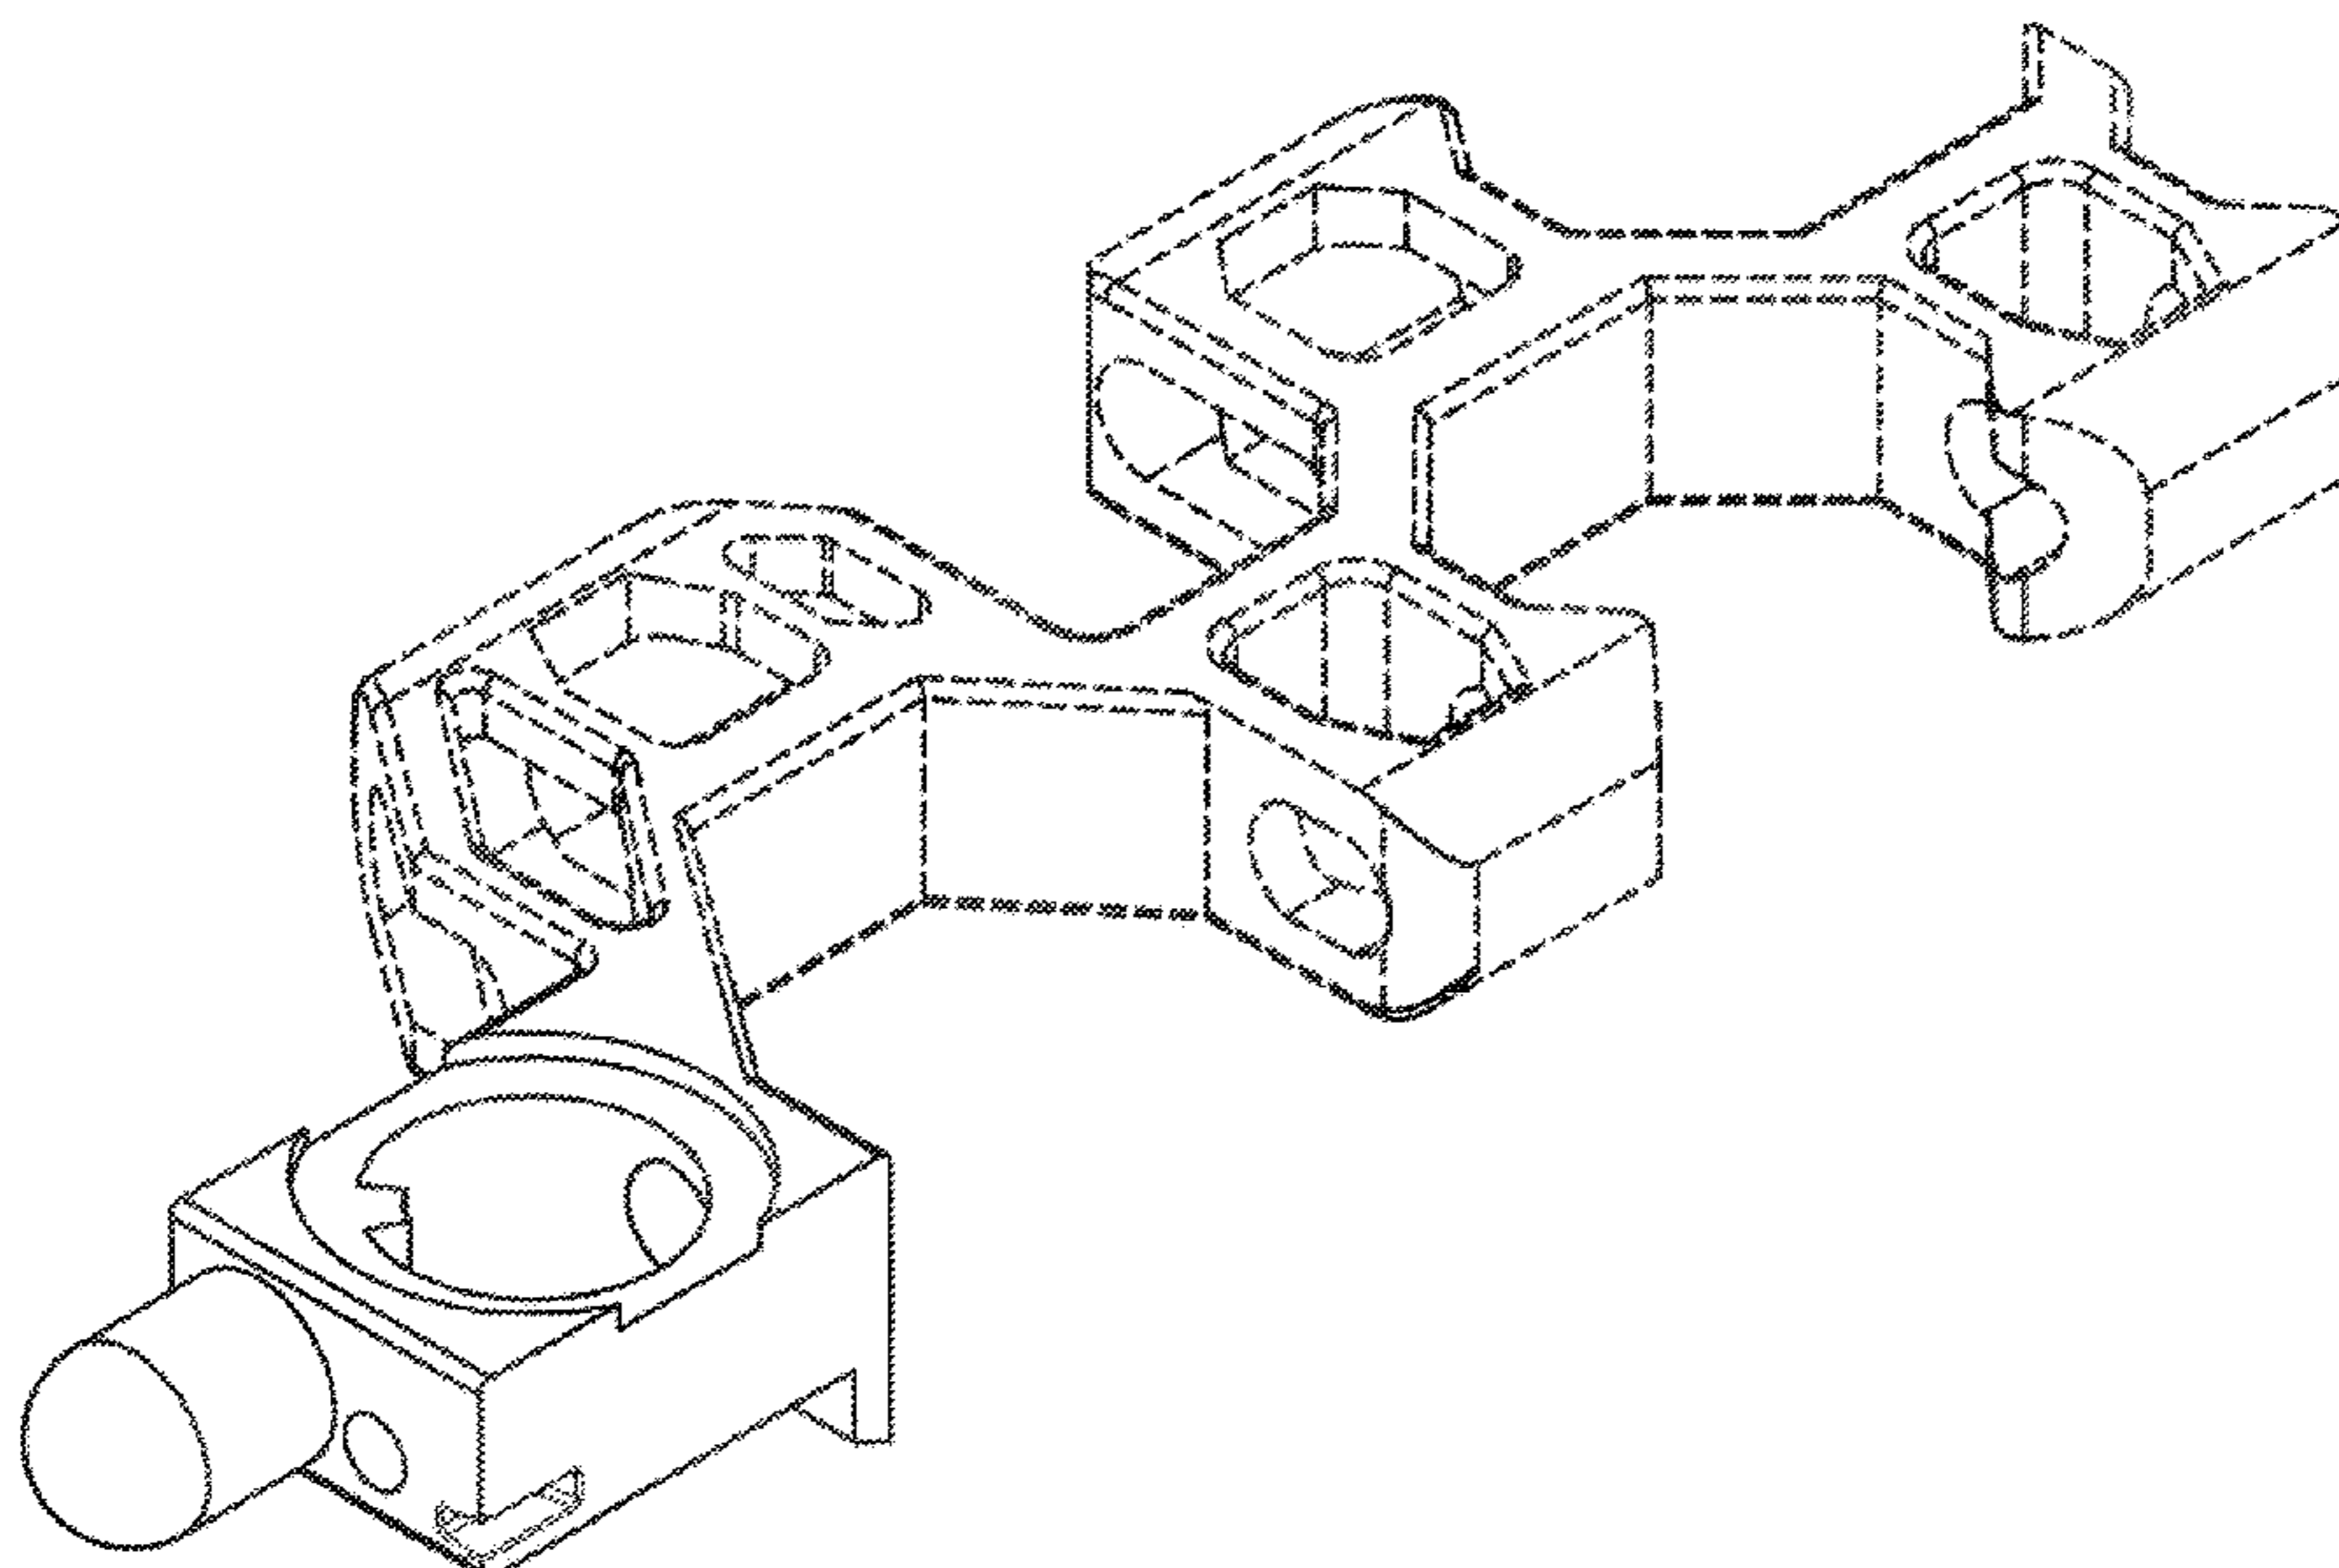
is a rear top perspective view of the conveyor belt module of FIG. 1.
